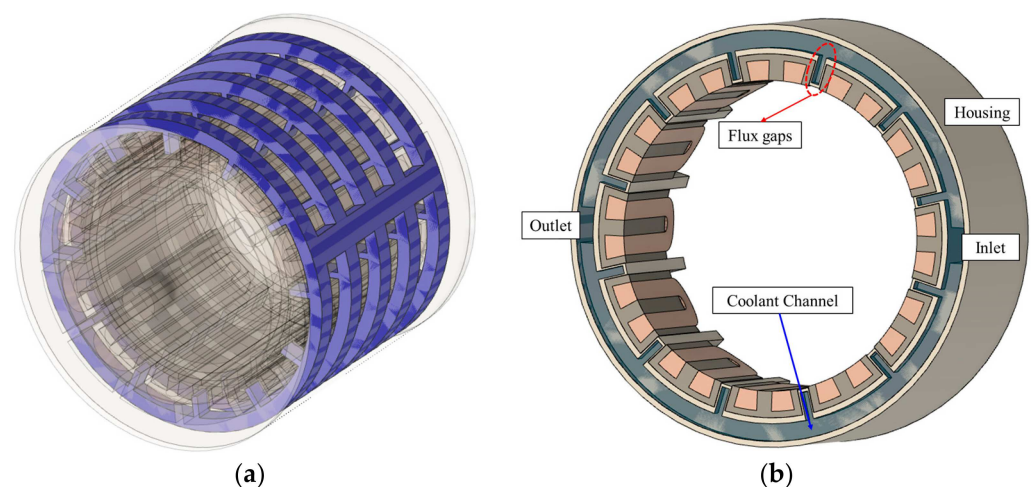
Water jacket design for the modular machine [114]. (a) Machine configuration and (b) coolant channel design.
